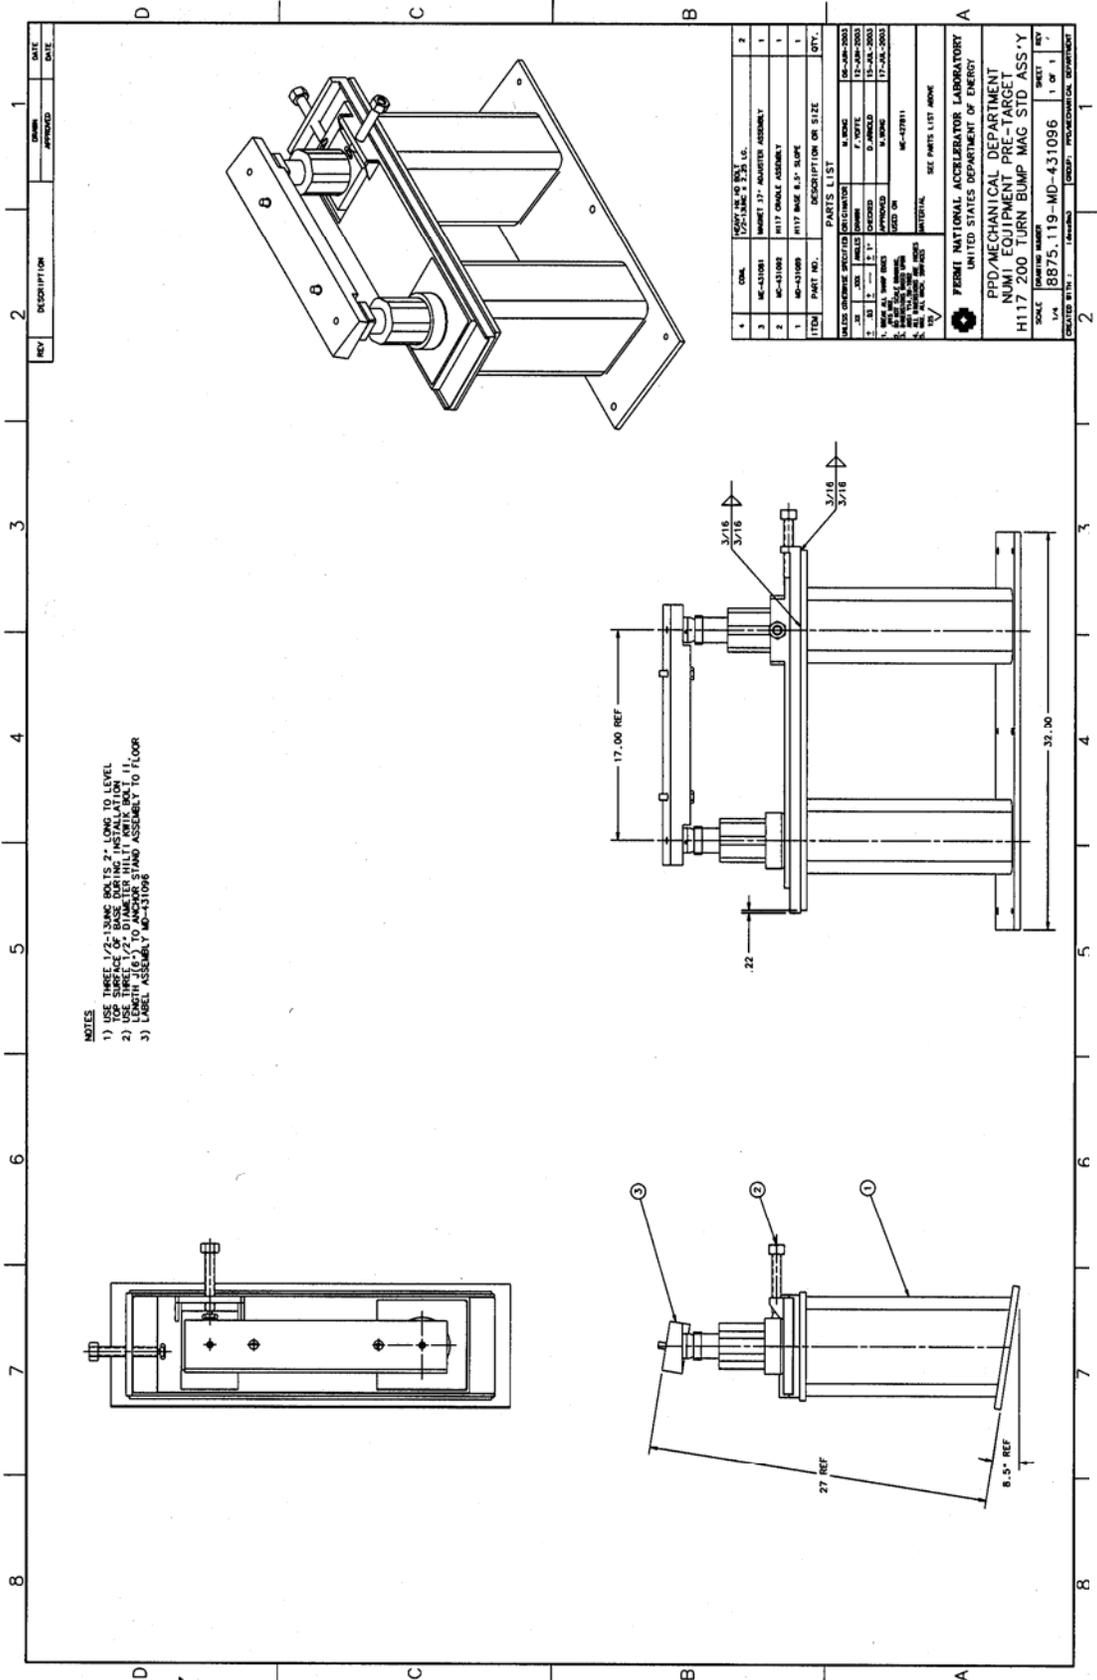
Stand Assembly for 200 Turn Bump Magnet (Drawing 8875.119-MD0431096)
